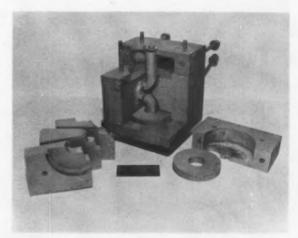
Complex machined graphite mold used to cast a valve body.
